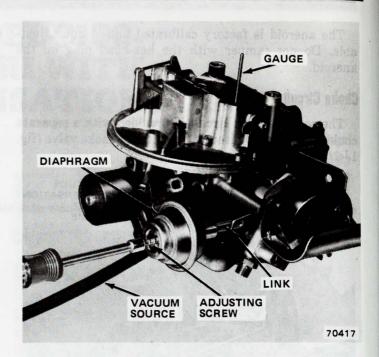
J-116 Initial Choke Valve Clearance Adjustment
